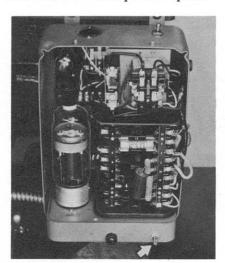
Electronic speed control unit on the Universal No. 107 Coil Winder, shown with housing cover removed. Arrow points to rheostat by which acceleration rate is adjusted.
